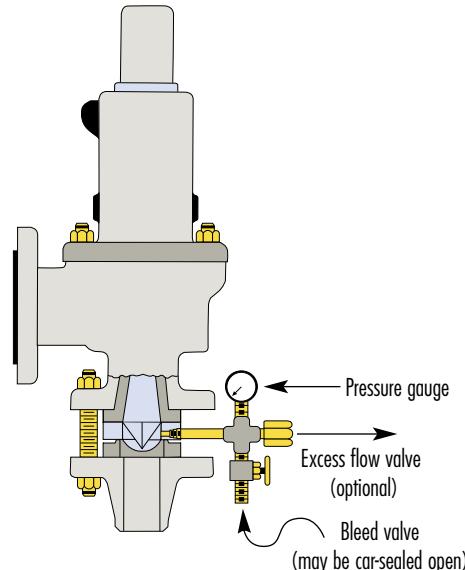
Typical Rupture Disk Assembly Installed in Combination with a Pressure Relief Valve
